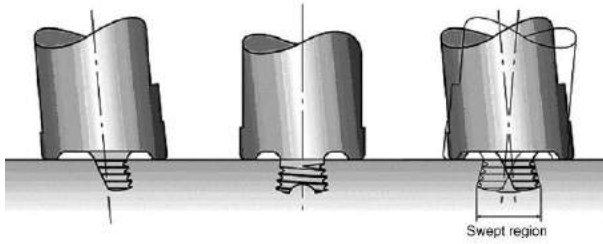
A-Skew™ tool developed by The Welding Institute (TWI), UK: (a) side view, (b) front view, and (c) swept region encompassed by skew action
